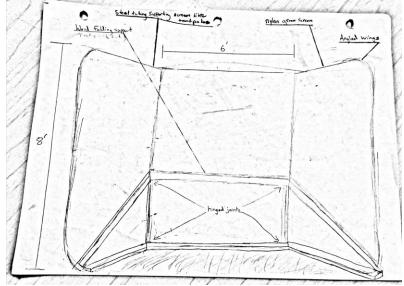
Drawing of The Icarus. Drawing by Karl Oman.
